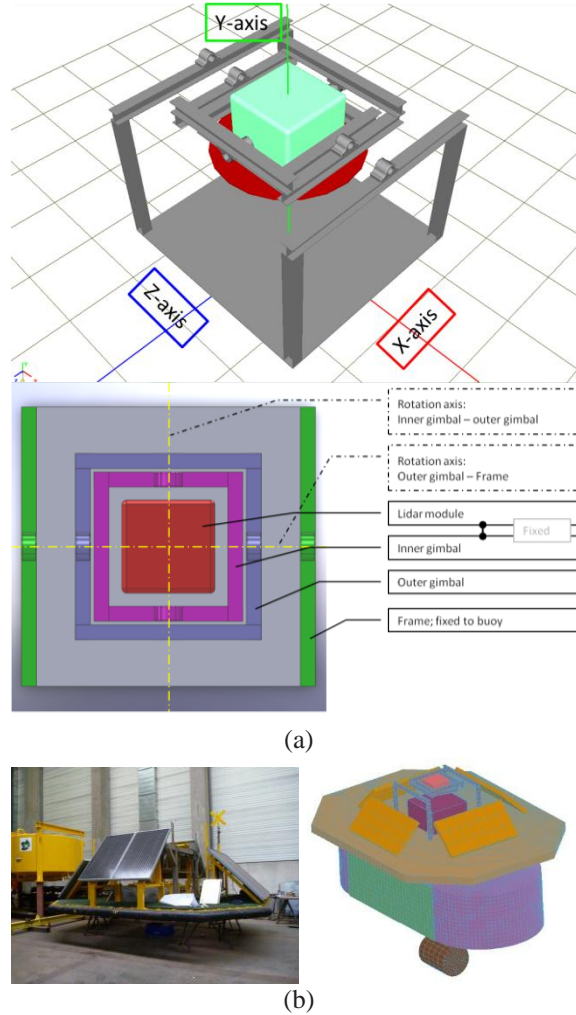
(a) CAD drawing of stabilization mechanism, (b) 3E working prototype and FE model
